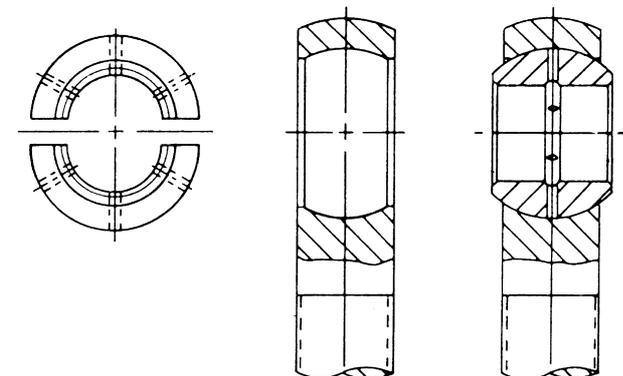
2- PIECE, SPLIT BALL ROD END
